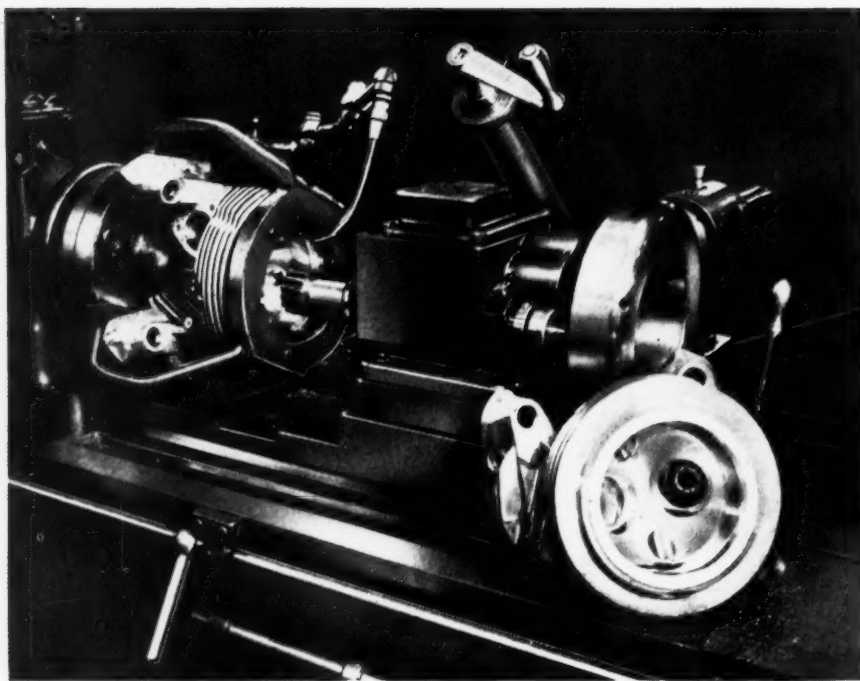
Milling Internal Threads on Cylinder Heads to Mate External Threads on Cylinder Barrel, on which They are Later Shrunk
